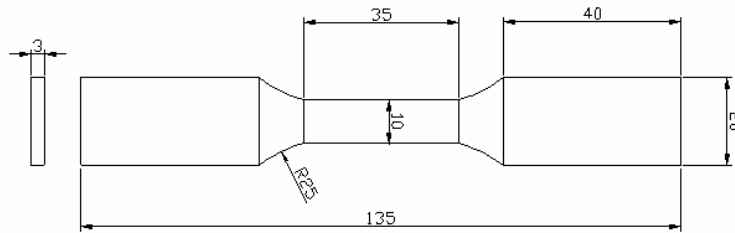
Tensile test bar with rectangular cross section (dimensions in mm).
